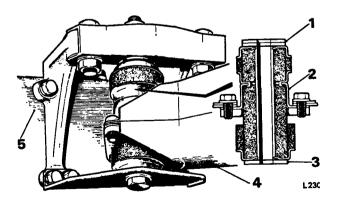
REAR SUSPENSION CROSS-MEMBER MOUNT
